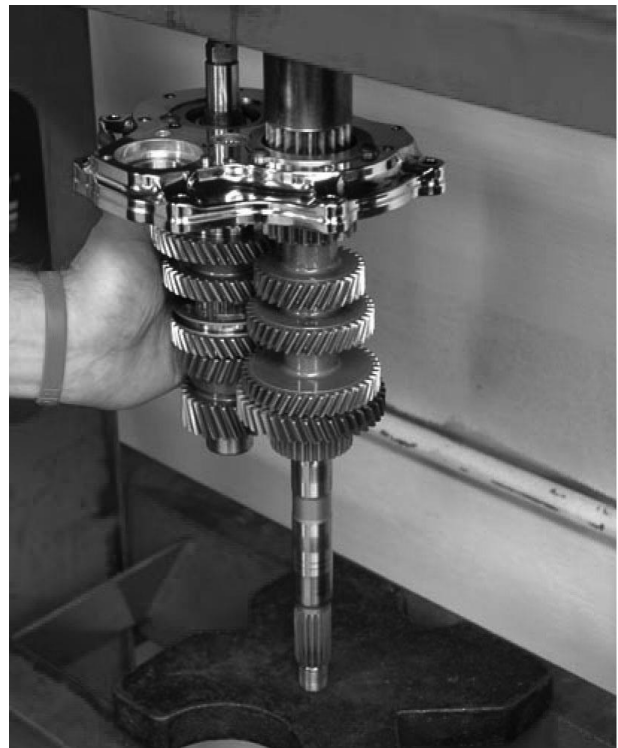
| WITH THE MAINSHAFT SQUARE TO THE PRESS, PRESS ON THE MAINSHAFT SIDE OF THE GEAR UNTIL FULLY SEATED
